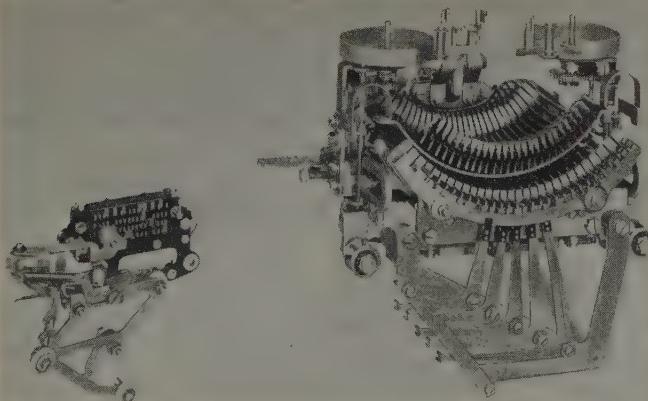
The new typebox assembly shown with the older moving-type basket carriage which weighs ten times as much as the new assembly
